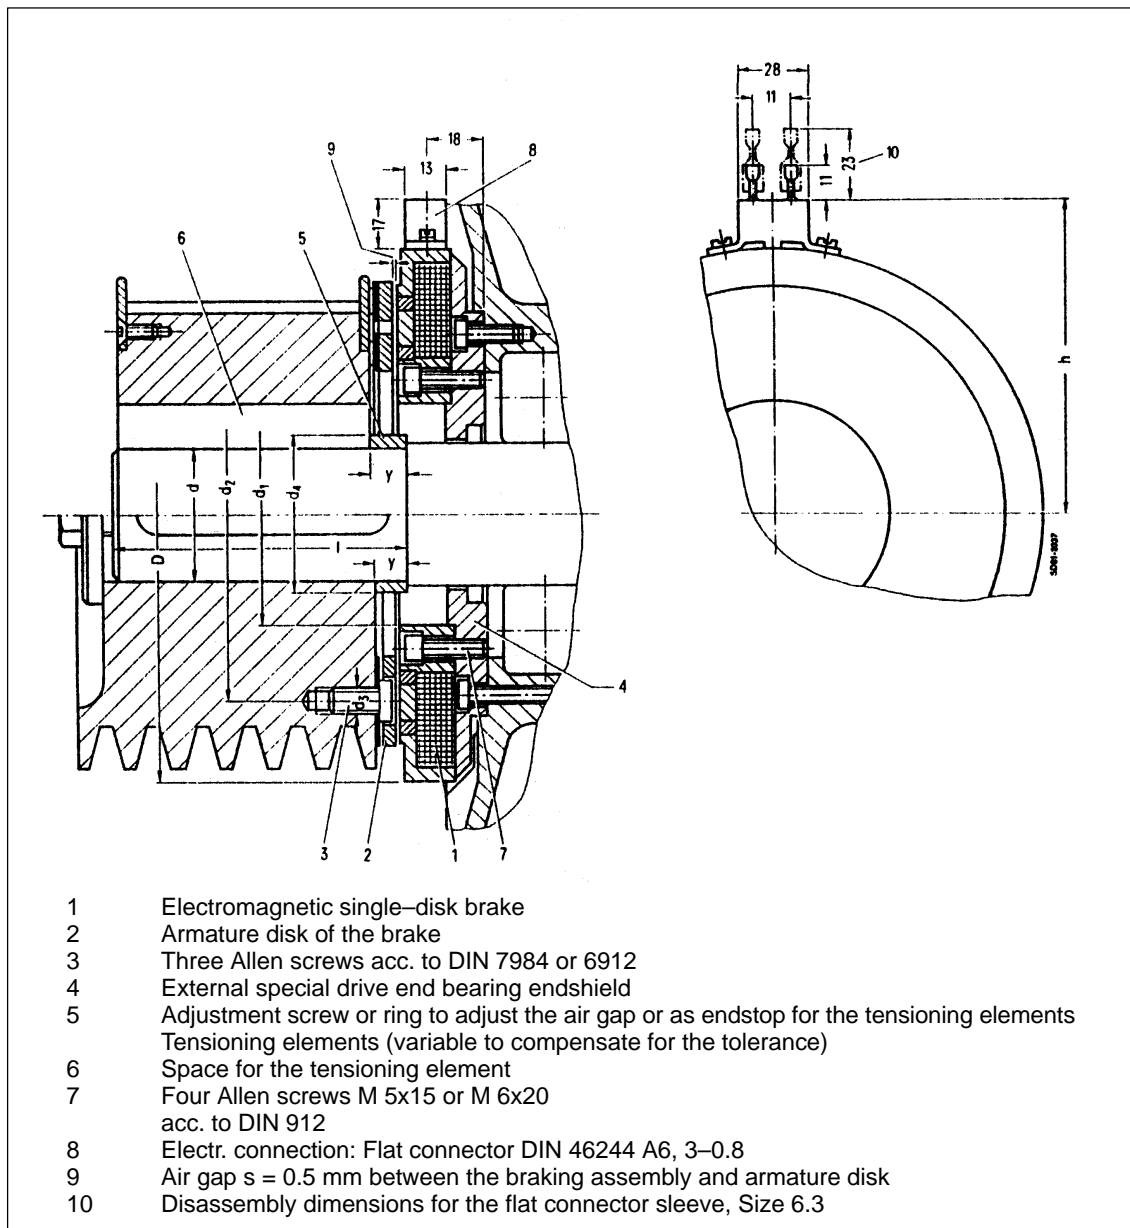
Mounting a holding brake on the A side of 1PH410□ up to 1PH416□ AC motors as example: The armature disk is mounted to a belt with key (upper half) and to a toothed-belt pulley for tensioning elements (lower half)
